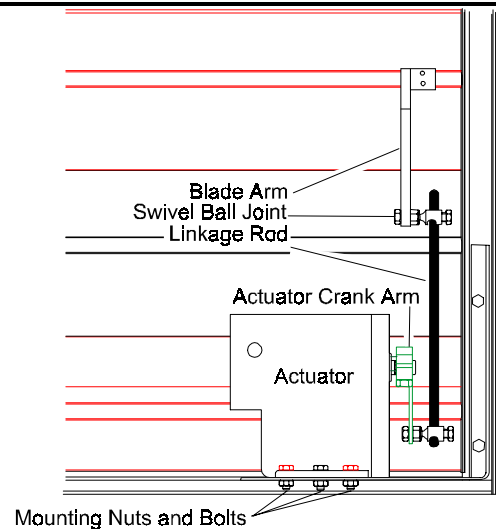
Internal Actuator Mounting Components, Right Side Shown
